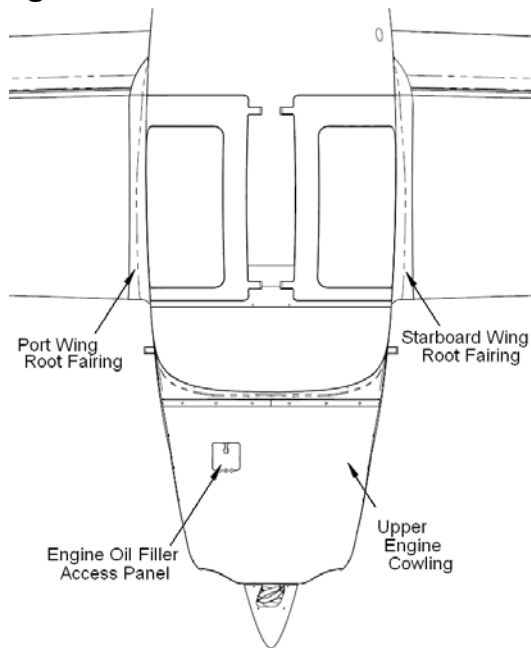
Wing Root and Engine Oil Filler Access Panel
